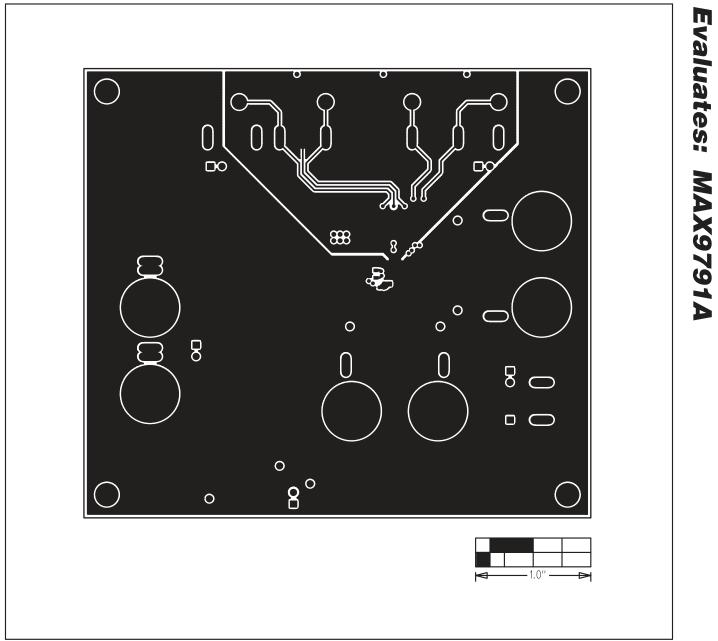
MAX9791A EV Kit PCB Layout—Solder Side
